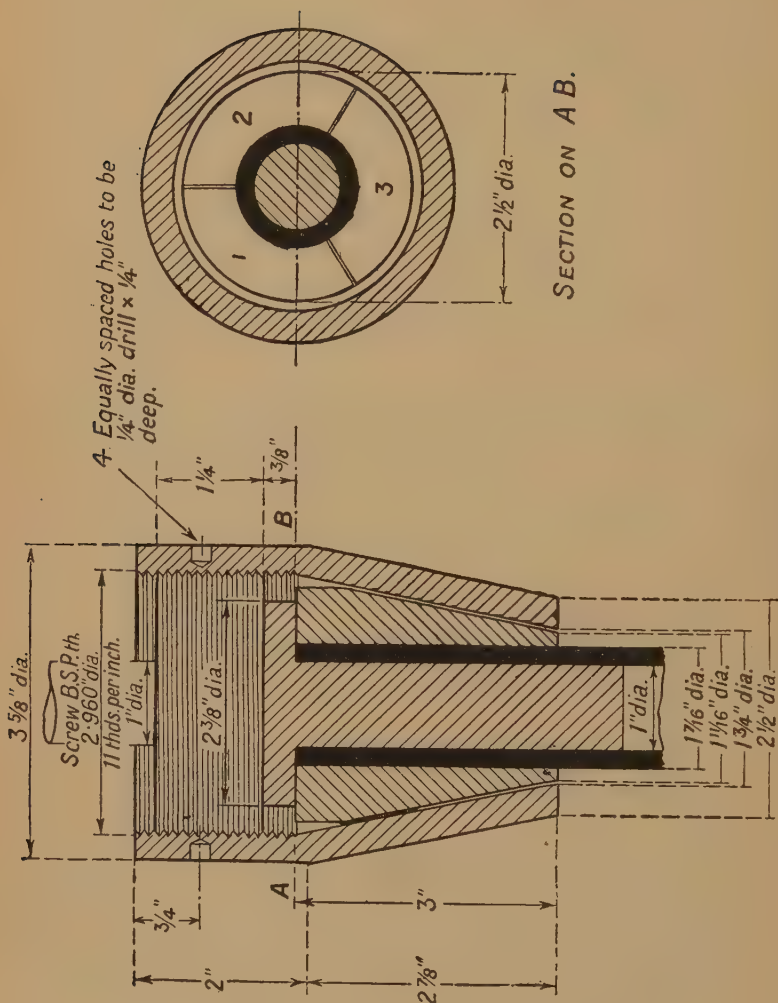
Form of Grip for Holding a Tube in Testing Machine for Tensile Strength and Extension Tests.
